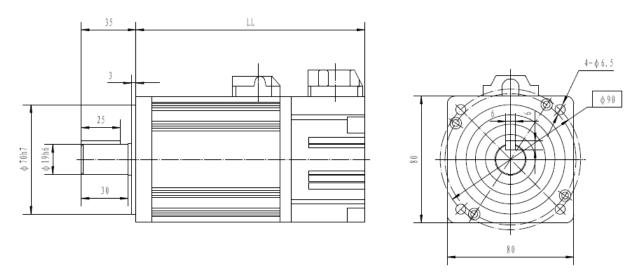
The dimension of 80 series AC servo motor (unit:mm)
